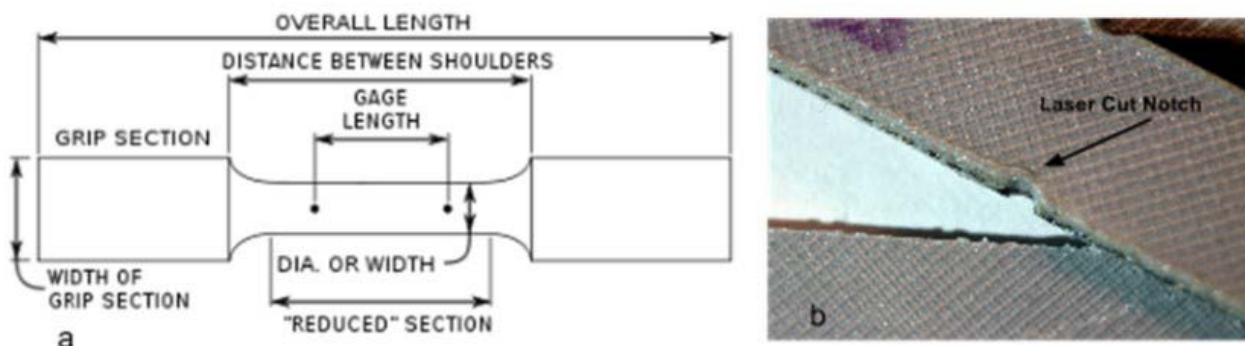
(a) Schematic of a standard tensile test specimen. (b) A laser-machined round notch to enable fracture to occur completely within the gage length section of the specimen.
